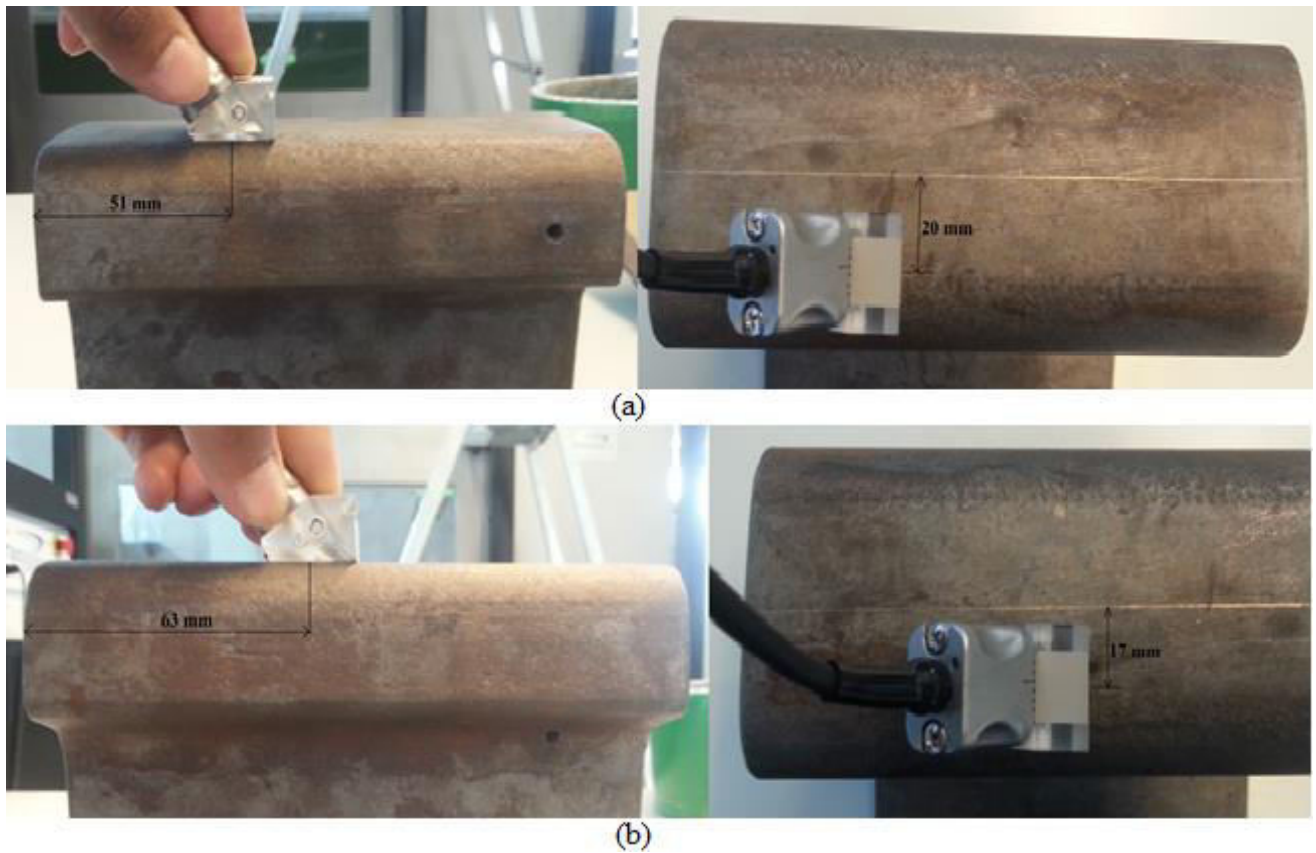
Position of PA2 (Wedge-2) on the test sample (a) for inspecting defect-1
